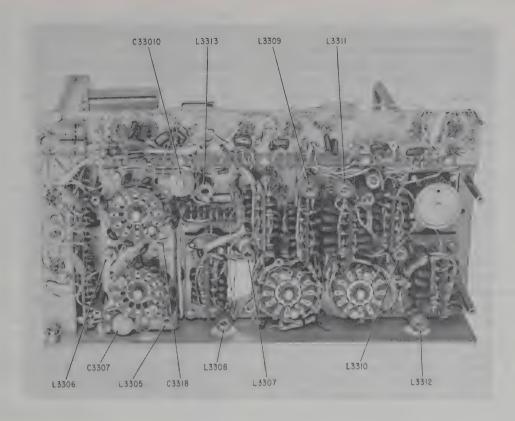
Channelizer Subassembly, End Cover Removed,
